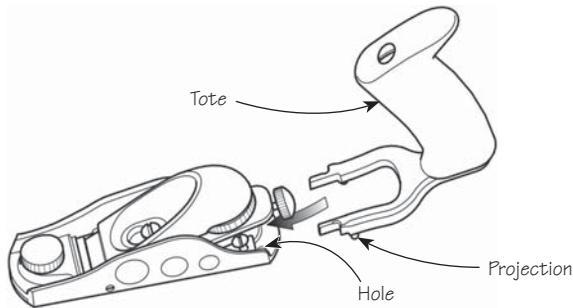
Heel of blade moved to expose threaded hole for mounting tote.
